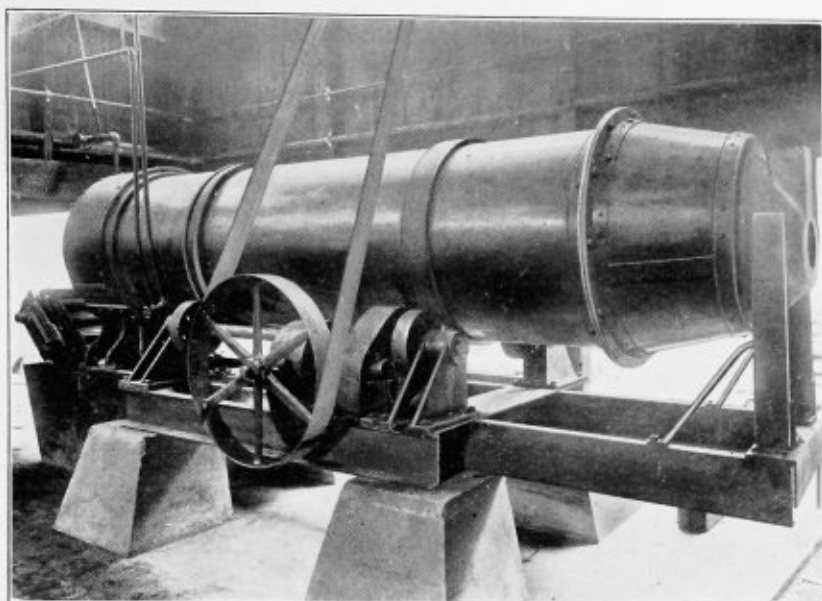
Rotary Annealing Furnace—Gas Fuel. Annealing Bolts, Rivets, Screws, etc.
